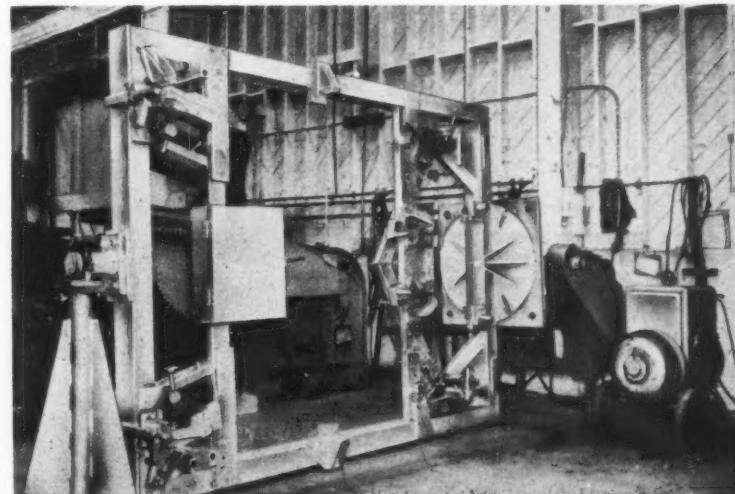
A Typical, Large, Trunnion-mounted, Welding Fixture which can be adjusted to Permit Welding to be Performed in the Horizontal Plane
